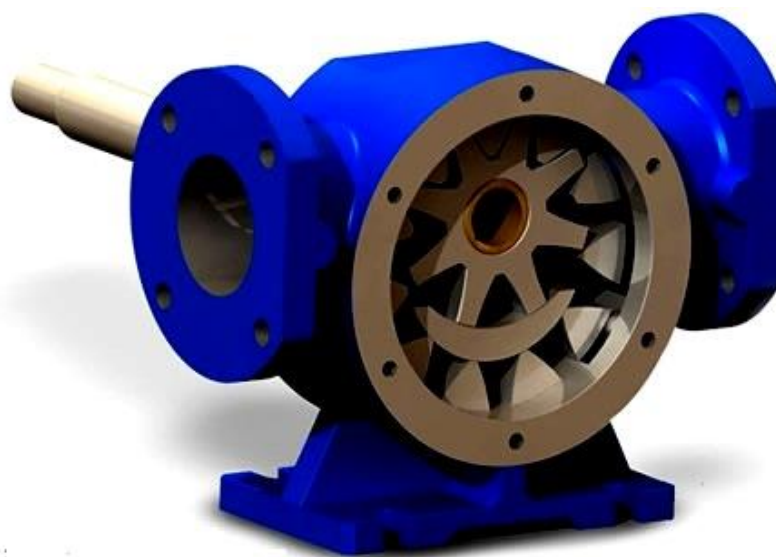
Conventional Internal Gear Pump [King Pompa - M Series] (9)
